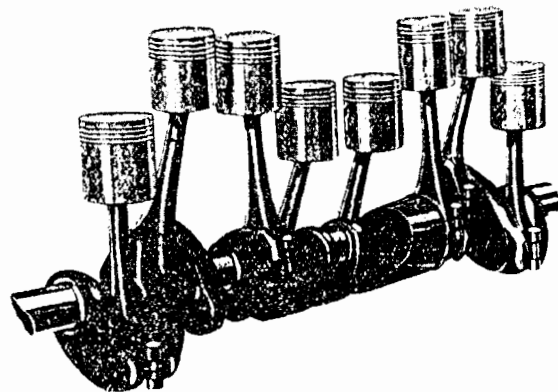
ESSENTIAL MOVING PARTS OF A TYPICAL MULTICYLINDER CRANK-CONNECTING-ROD ENGINE
